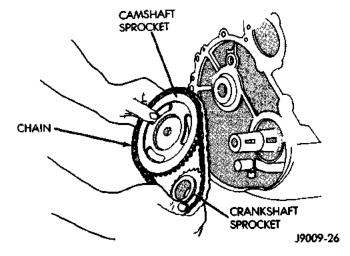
Camshaft and Crankshaft Sprockets and Chain
